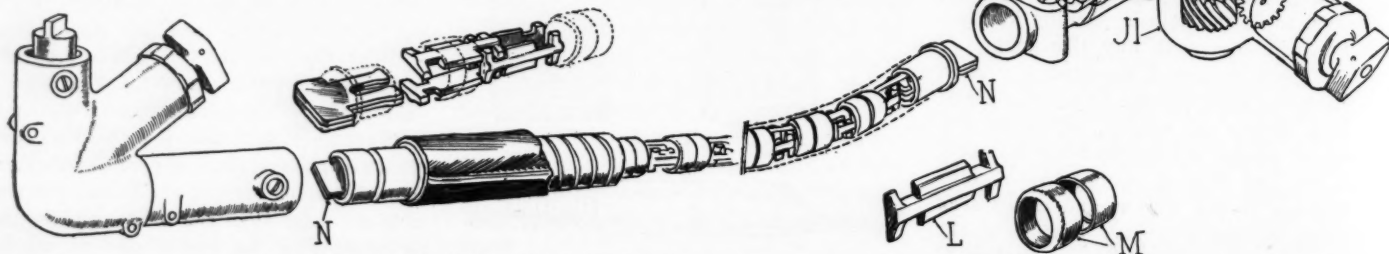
Showing the flexible shaft together with other fittings, including swivel and angle joints
